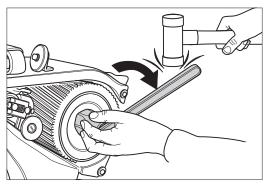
Release the box nut (left-hand thread), if necessary by knocking gently with a soft hammer. Never use a steel hammer!
